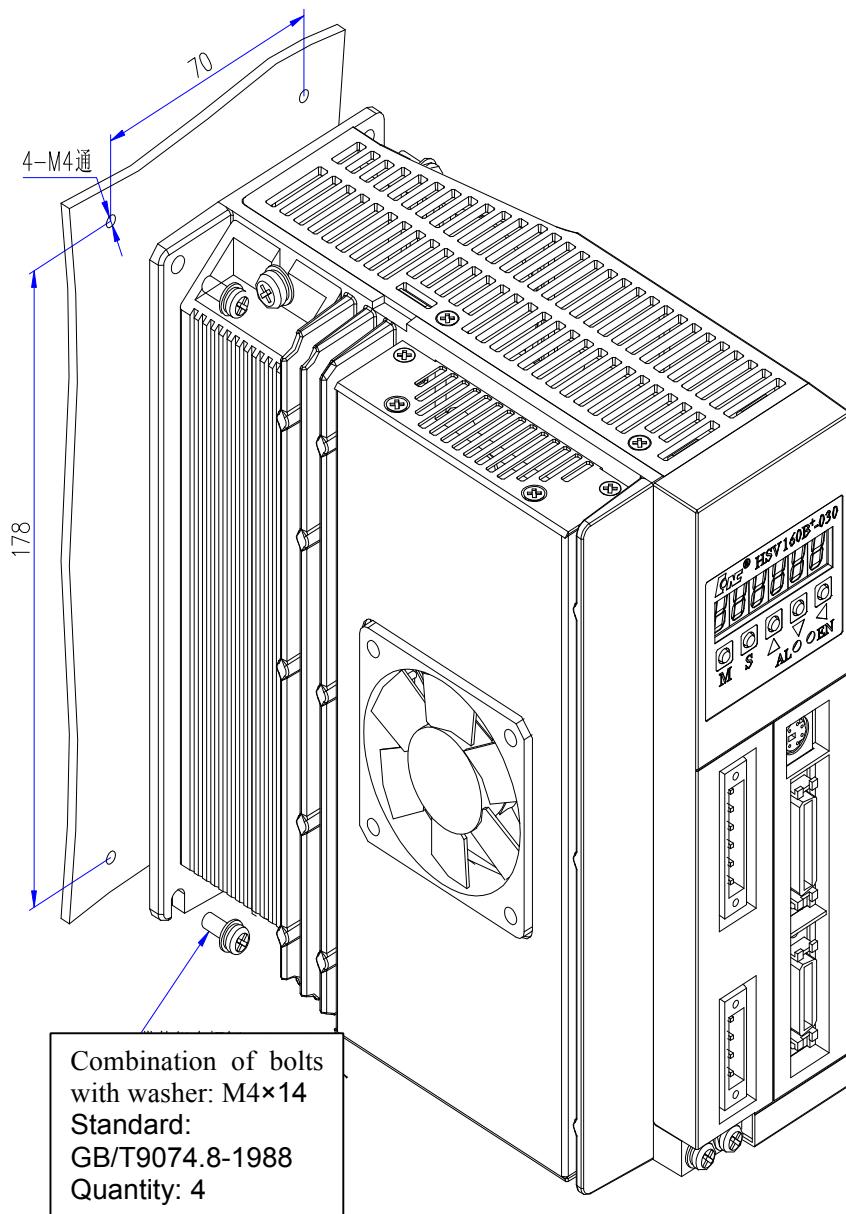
Schematic drawing of HSV-160B⁺-050/075 AC servo drive base plate mounting
